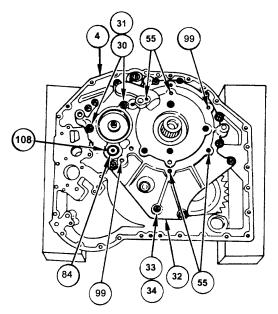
Right Hand Cover Assembly. INSTALL BRAKE COOLANT VALVE COMPONENTS
